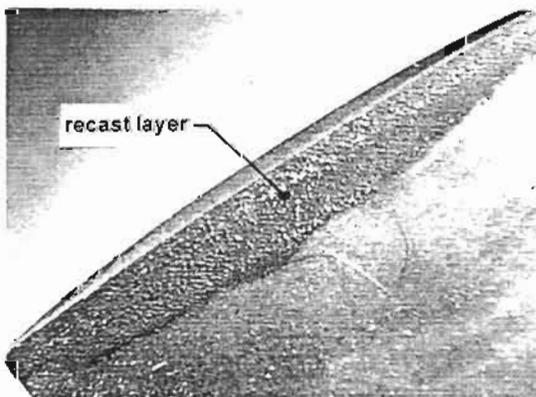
Rotor blade, concave side, showing black Ti-Ni
